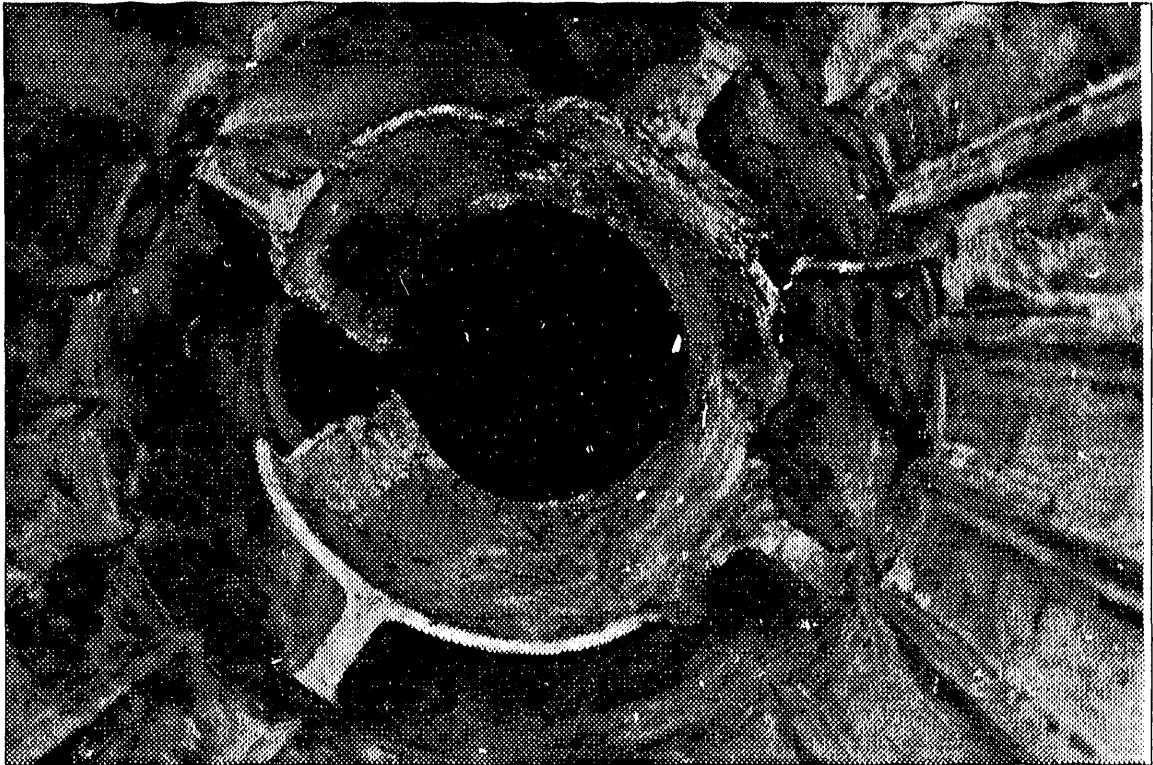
Damaged Burner Viewed From Inside Burner Barrel
